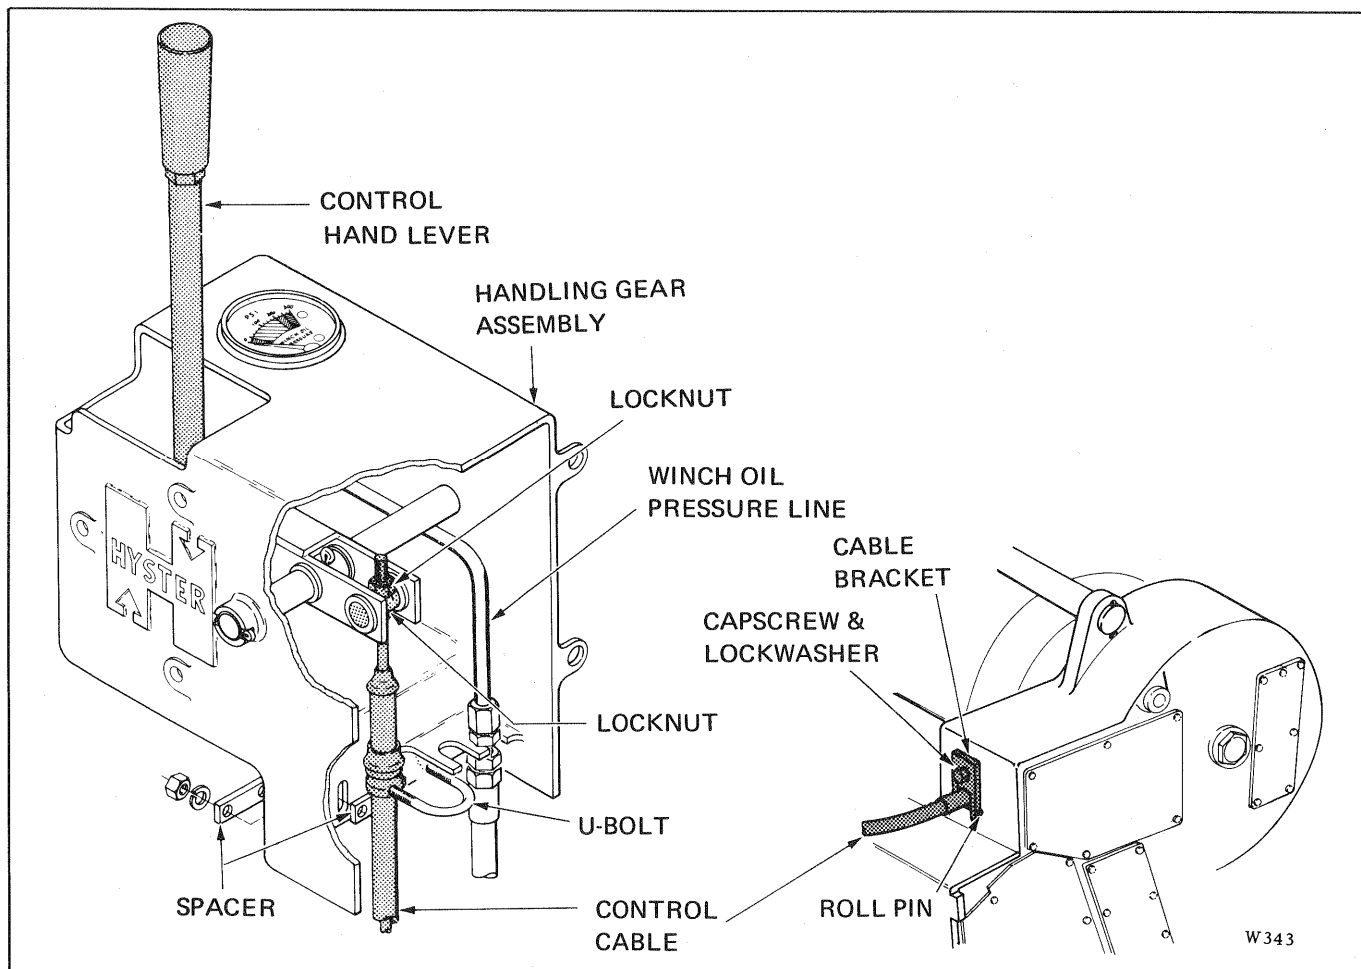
CONTROL CABLE ADJUSTMENT
